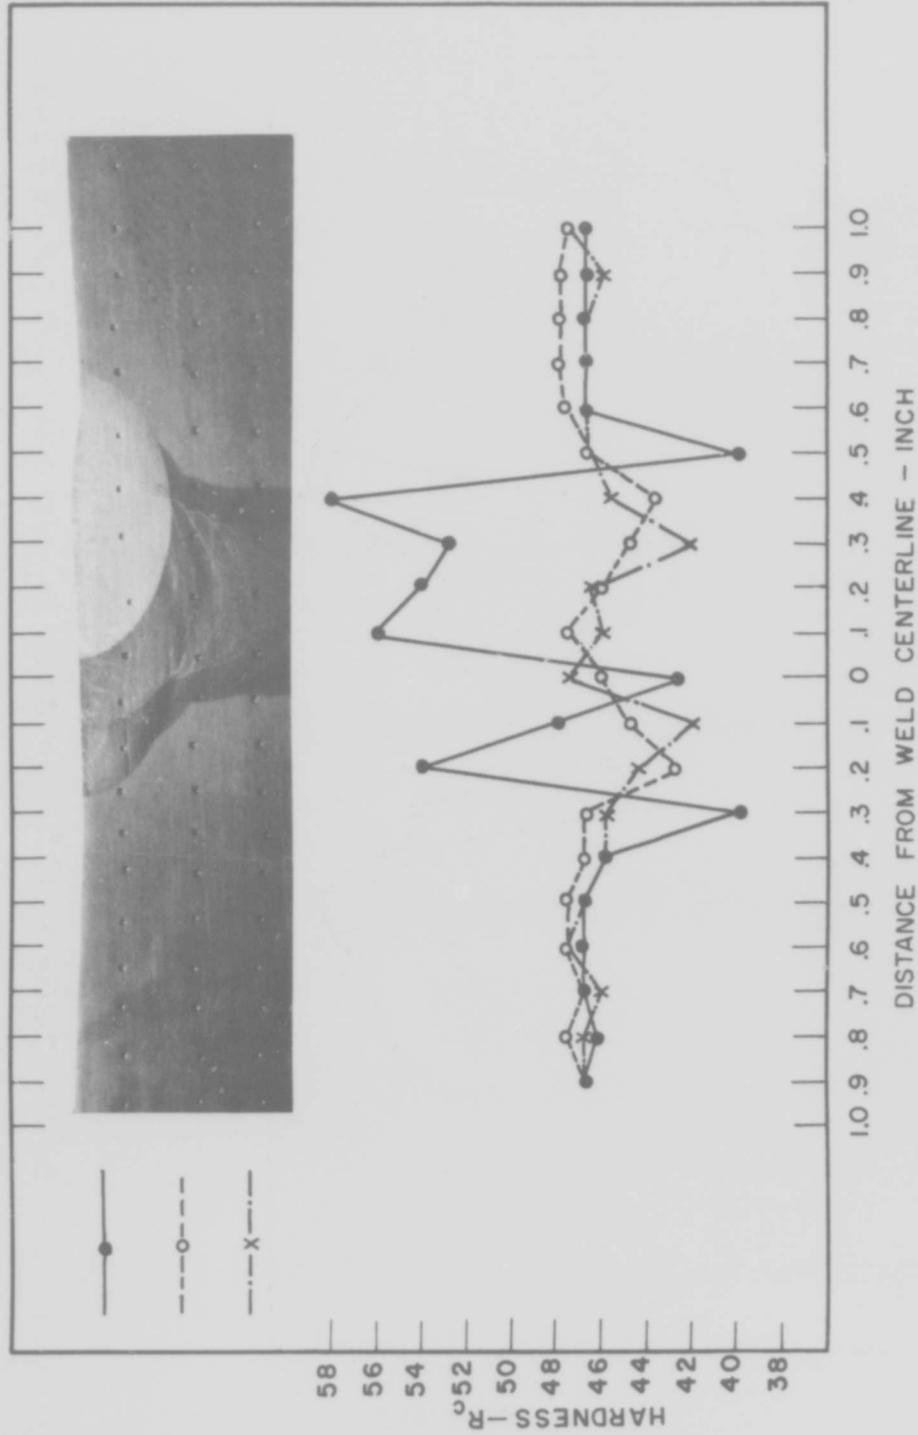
Hardness Survey of Multipass TIG Weld No. 0272 Made in 1/2-Inch HP 9-4-45 Plate Without a Pre- or Post-Heat.
